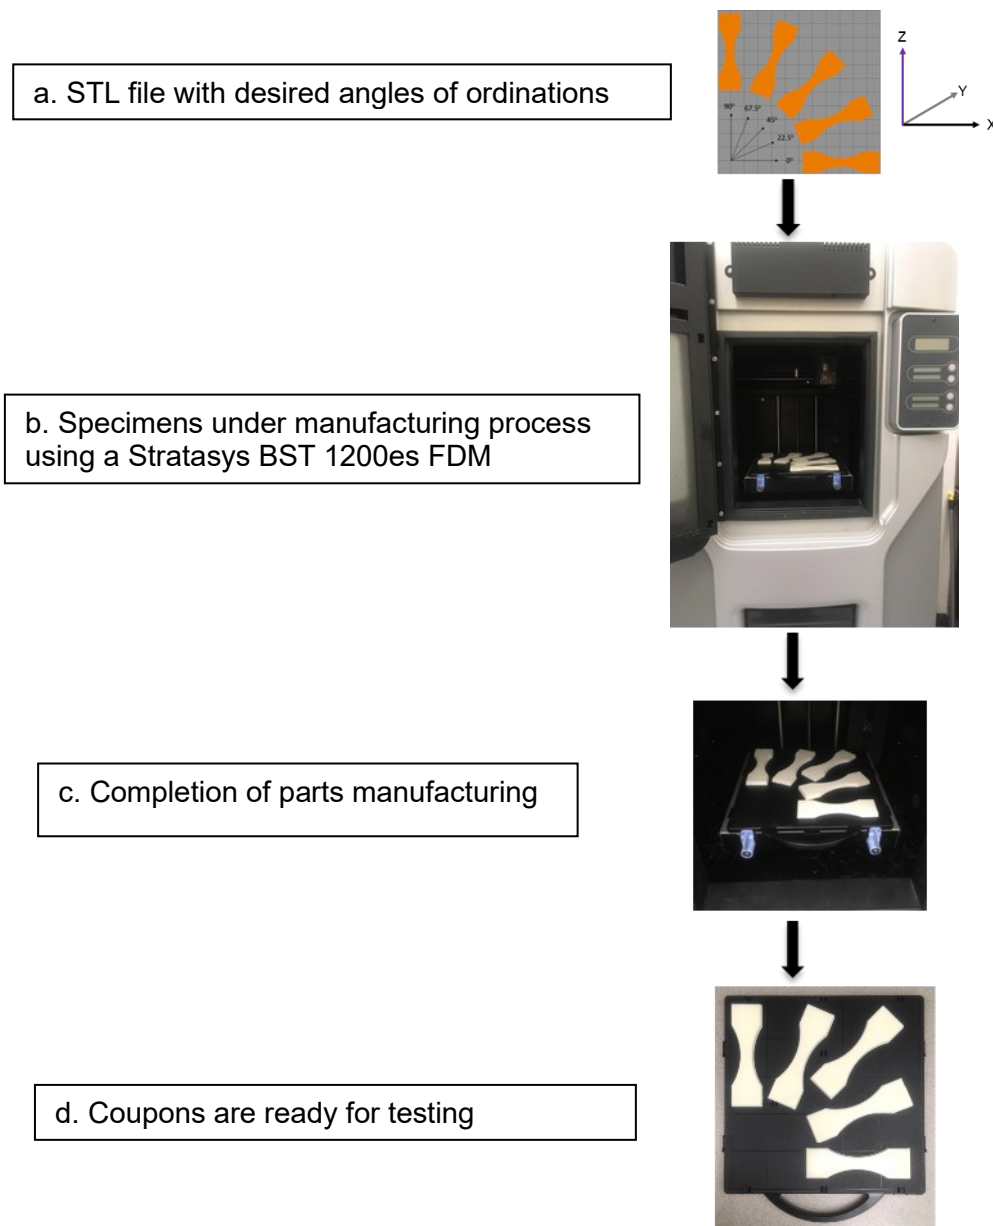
The manufacturing process of AM fatigue flat specimens.
